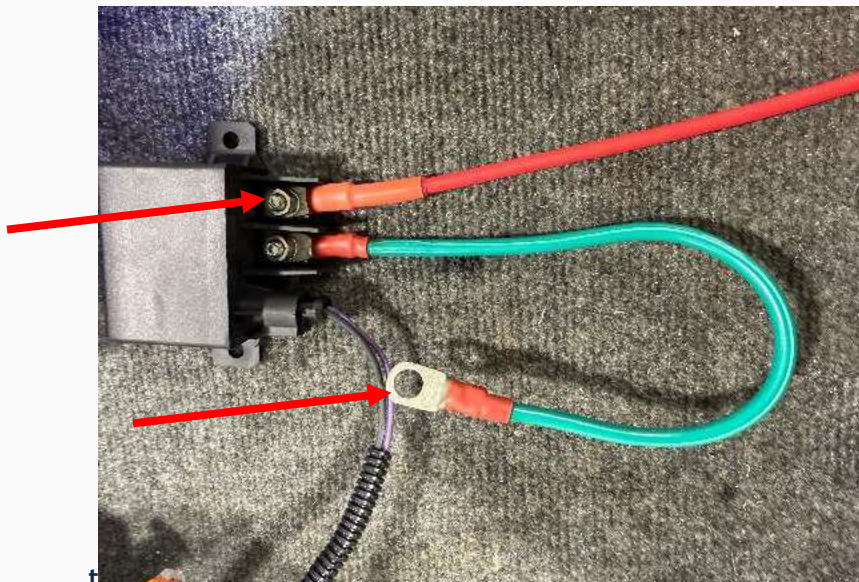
New 120-amp relay — compressor positive power wire and 12" power wire connections.
